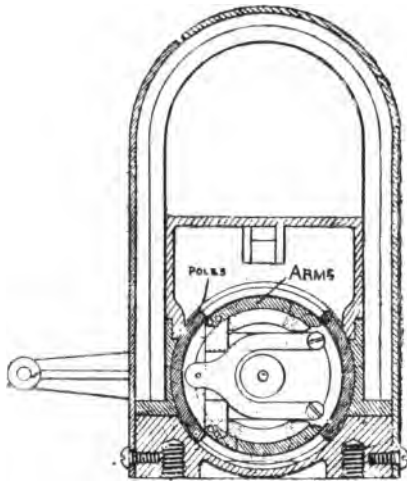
Front view of Armature, movable extension of pole-pieces, and electro-magnetic contact breaker of the Gianoli High tension Magneto.
